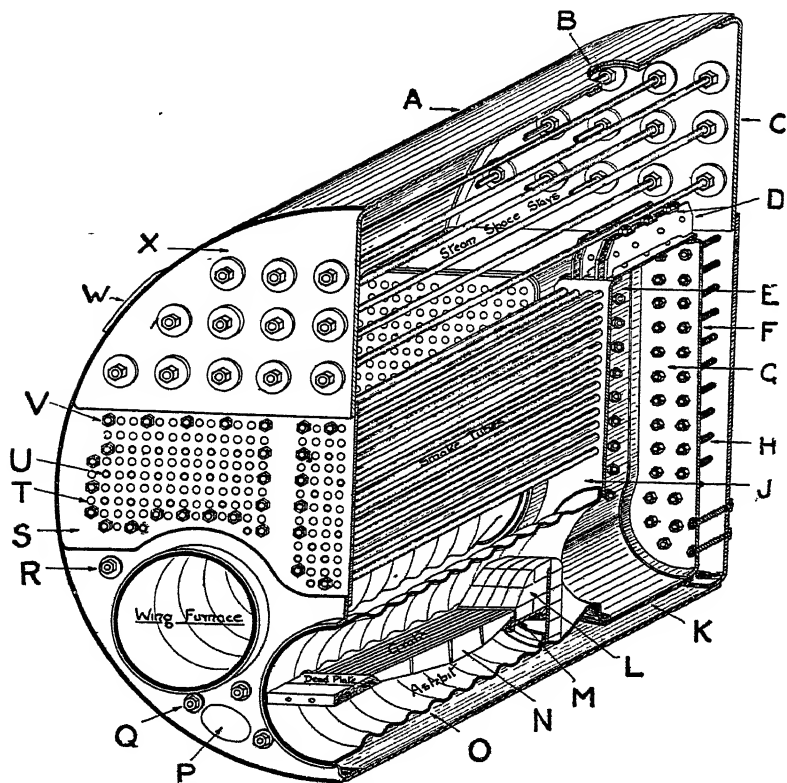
Single Ended Scotch Boiler (in section) without Mountings.
